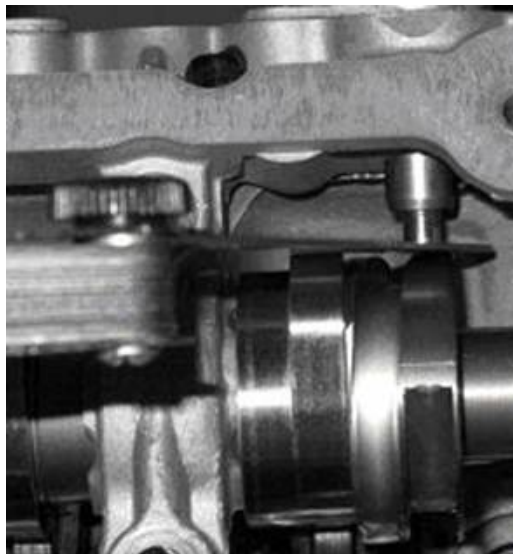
Measurement of distance from tip of adjustment unit to camshaft with gauge.
